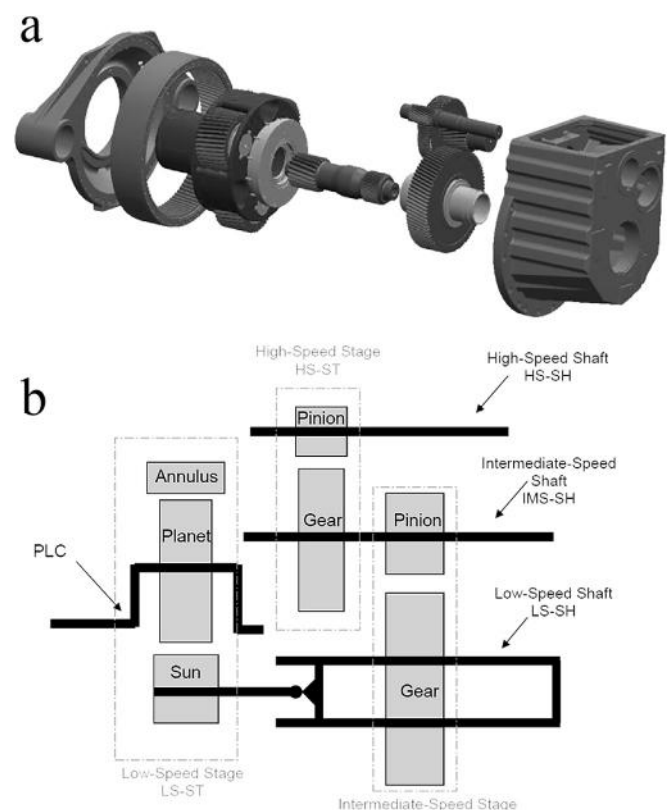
(a) View of internal components of the test gearbox. (b) Internal nomenclature and abbreviations of the test gearbox.
